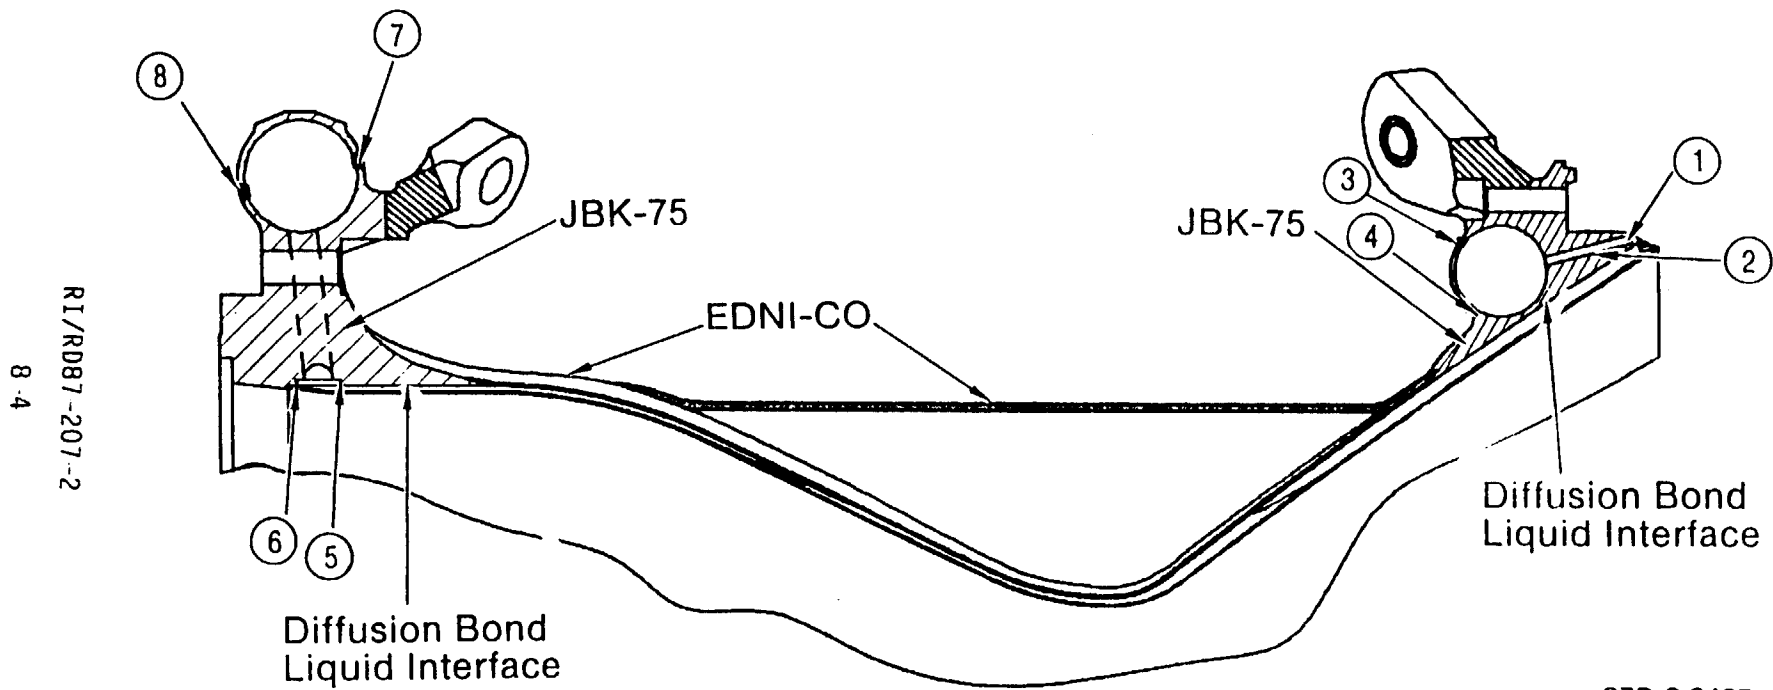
depicts a design option requiring only eight welds, no HEE protection, and no separate I-718 jacket details. The manifolds are made from material not sensitive to hydrogen. The use of diffusion bonding to attach the manifolds eliminates several welds, and the use of electrodeposited nickel-cobalt alloy precludes the necessity to attach a separate I-718 jacket, eliminating several more weldments.
